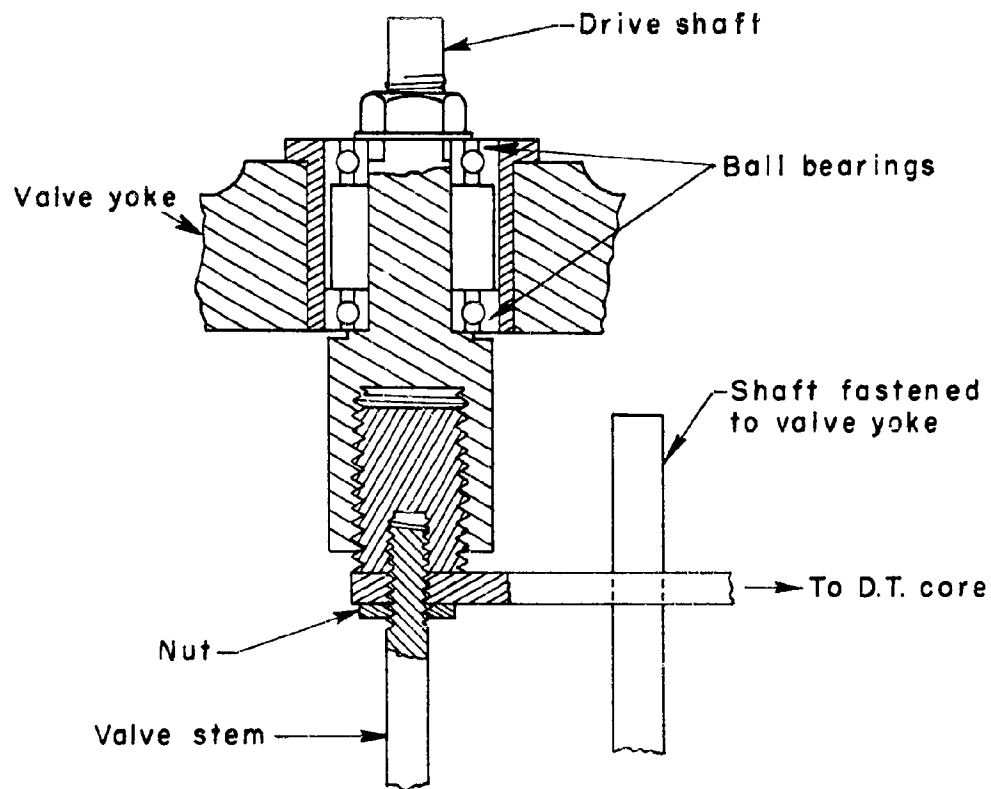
SECTIONAL VIEW OF ANNIN VALVE DRIVE MECHANISM
